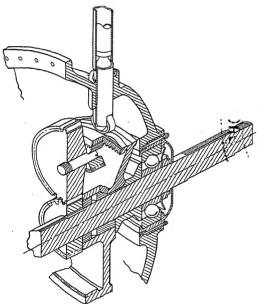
Usual valve-gear arrangement for radial engines.
